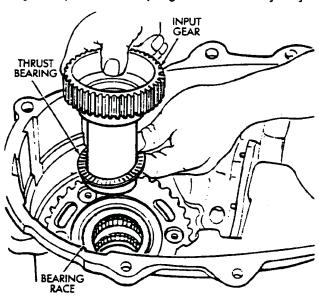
Remove Input Gear, Thrust Bearing and Race
